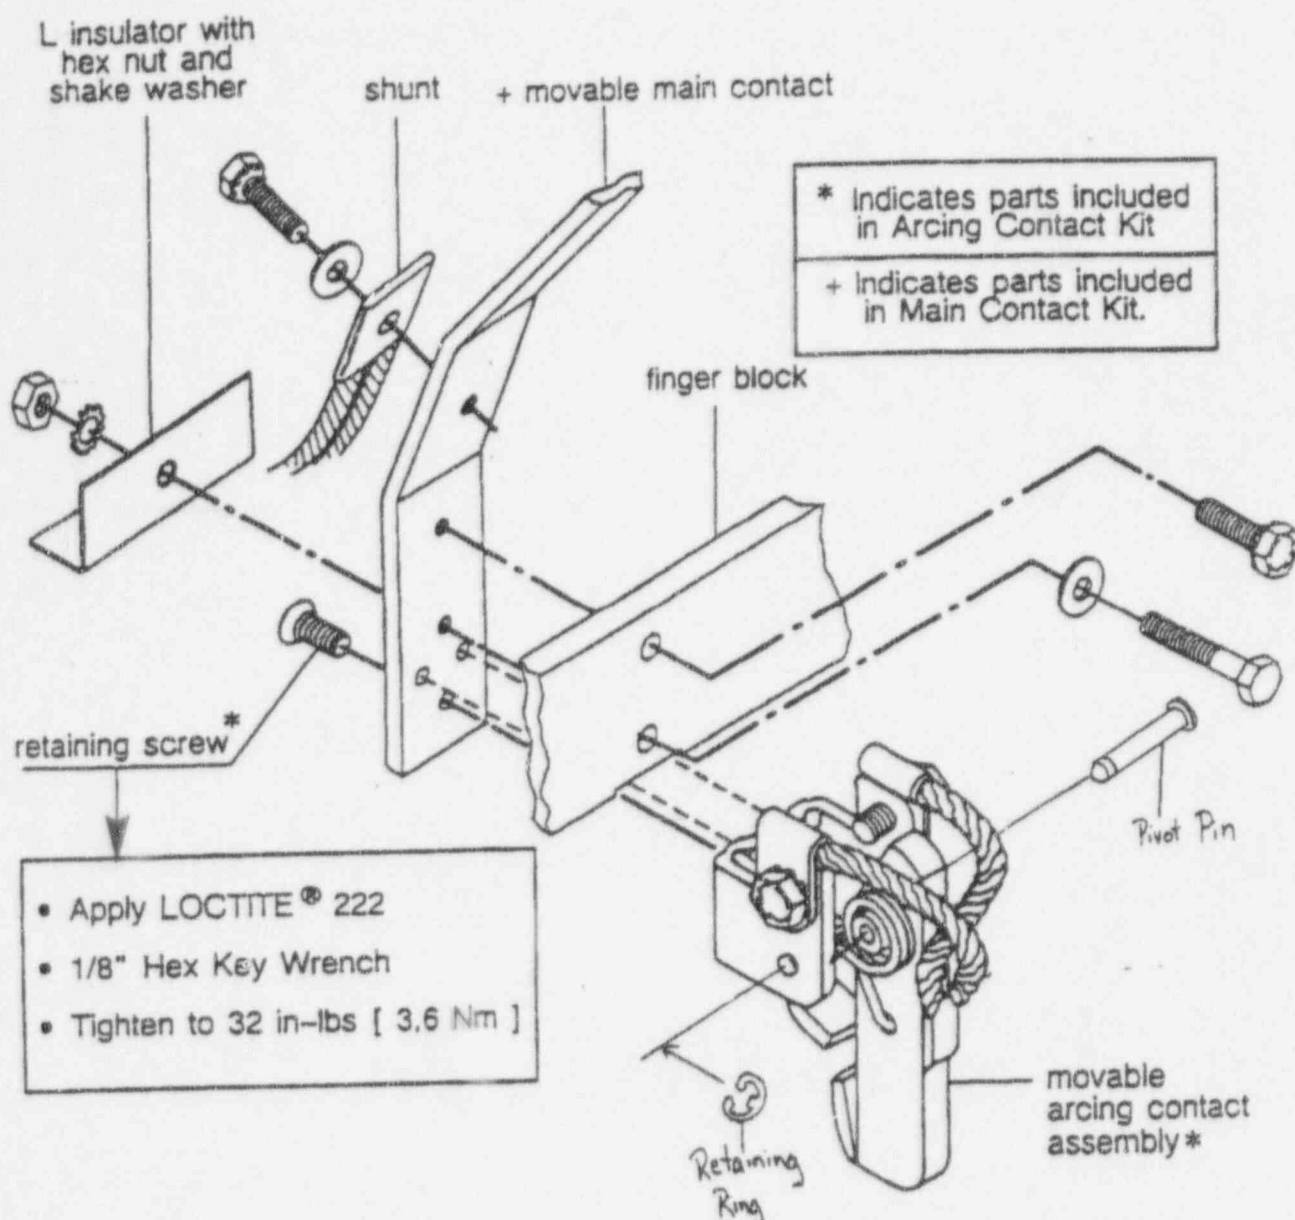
Arcing and Main Movable Contact Assembly (one pole shown) 300 & 600 A
